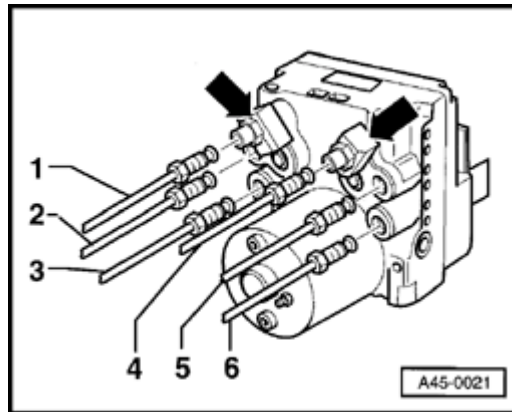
Brake line connections at the hydraulic unit for ABS/EDL, front wheel drive and ABS/EDL/ASR front wheel drive
